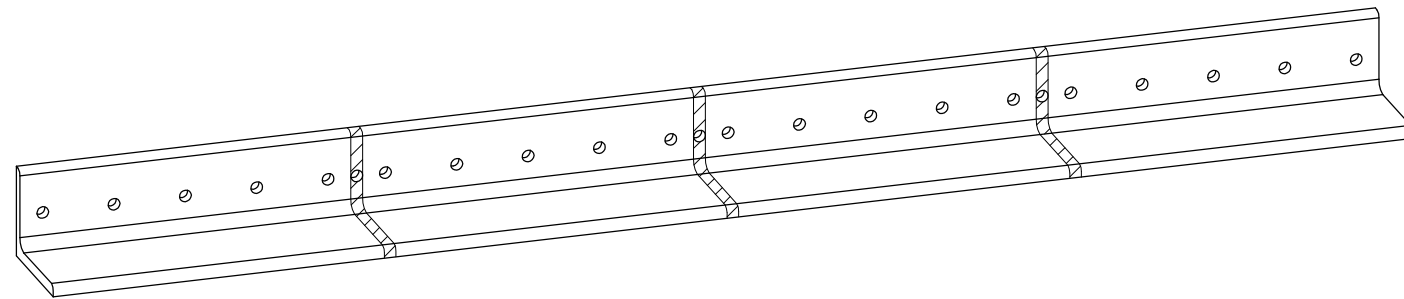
SEPARATE THE F-1236 STEP ATTACH ANGLES
